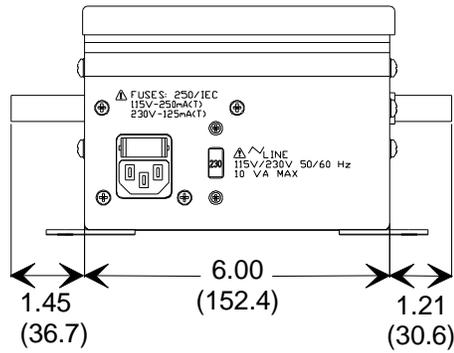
Back View of the 220 Transducer (AC Powered Unit shown)
